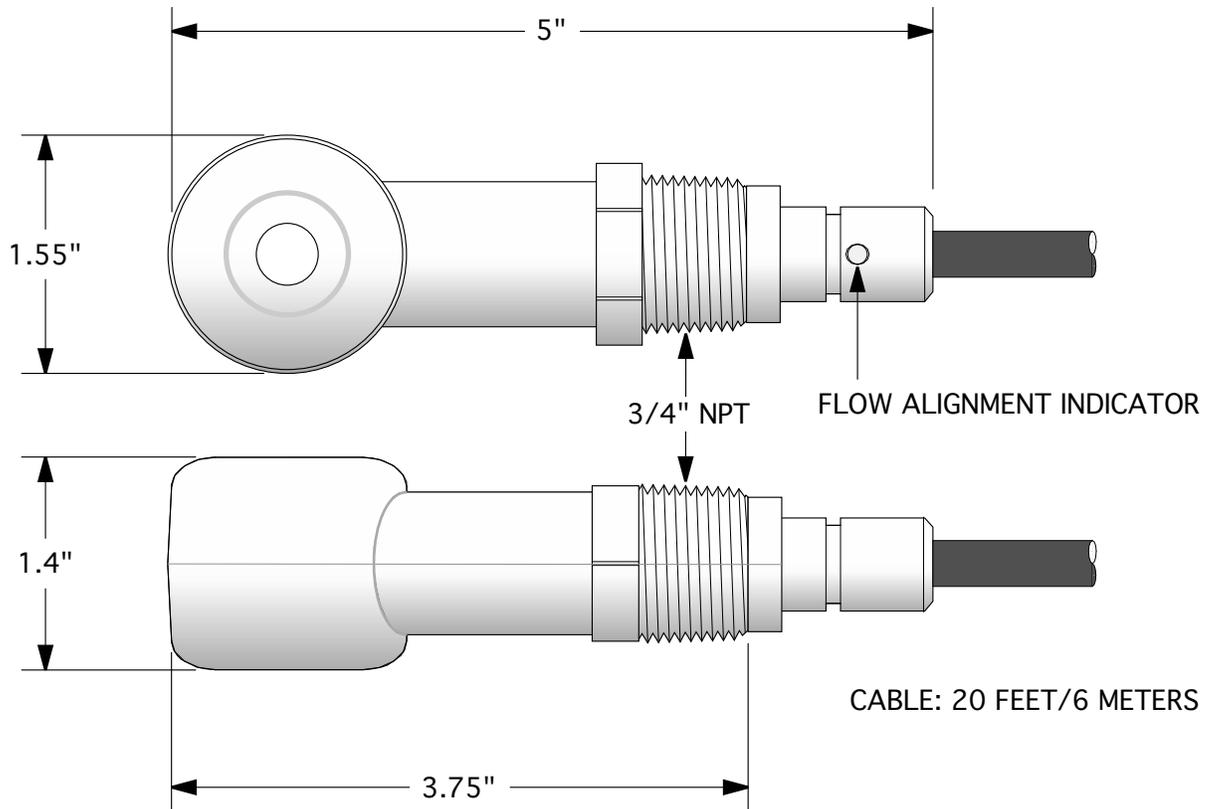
cell constant configurations shown without waterproofing option. Please inquire to factory for overall sensor length and dimensional details if a waterproofing option is to be added to sensor. The compression fitting style assembly can also be used for fully submersible so long as a suitable immersion rod (a.k.a. standpipe) is secured to the rear 3/4" MNPT threads.
